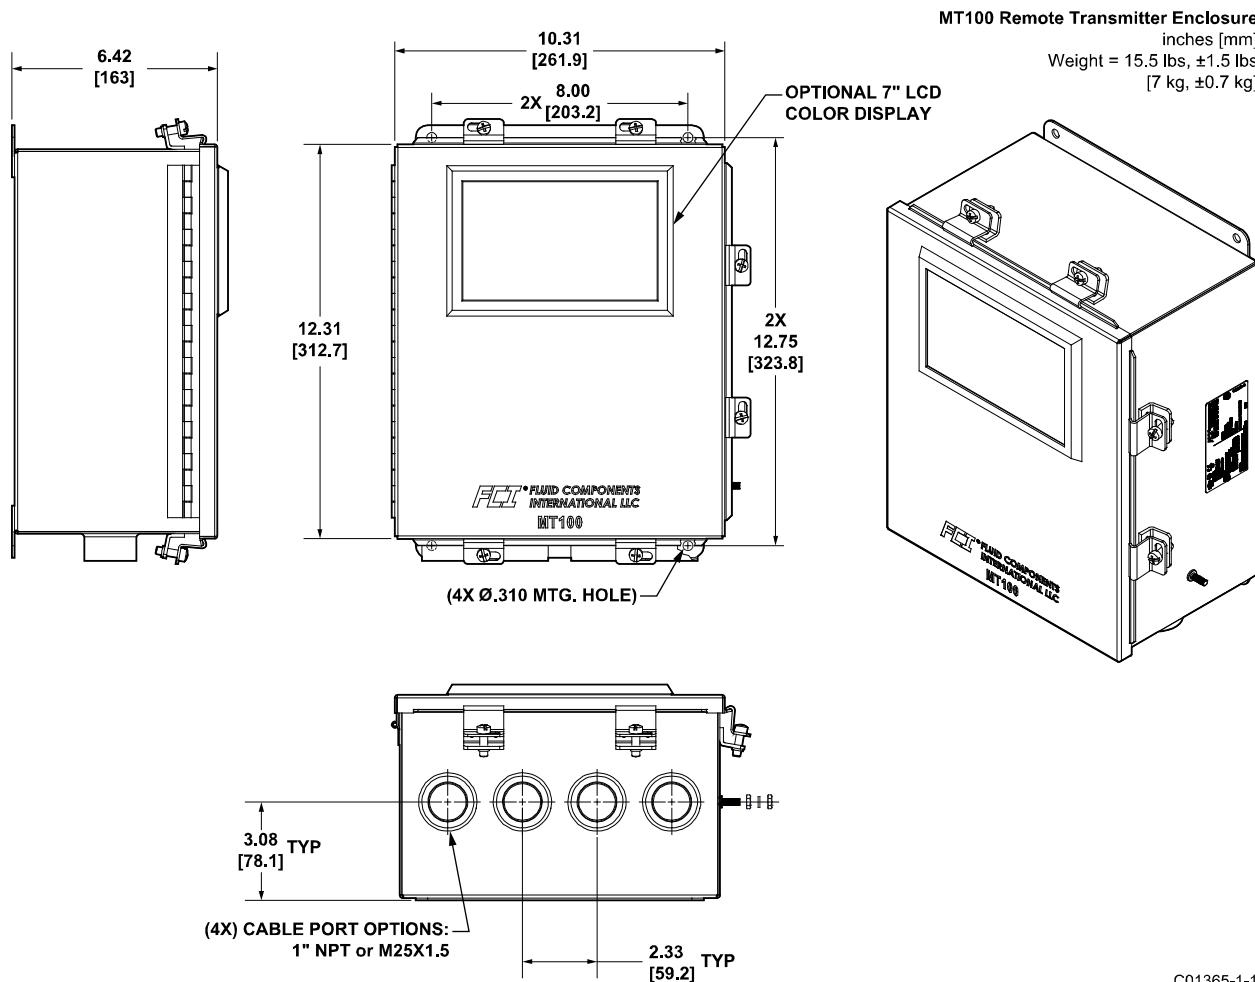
MT100 Remote Transmitter Enclosure Outline Drawing
